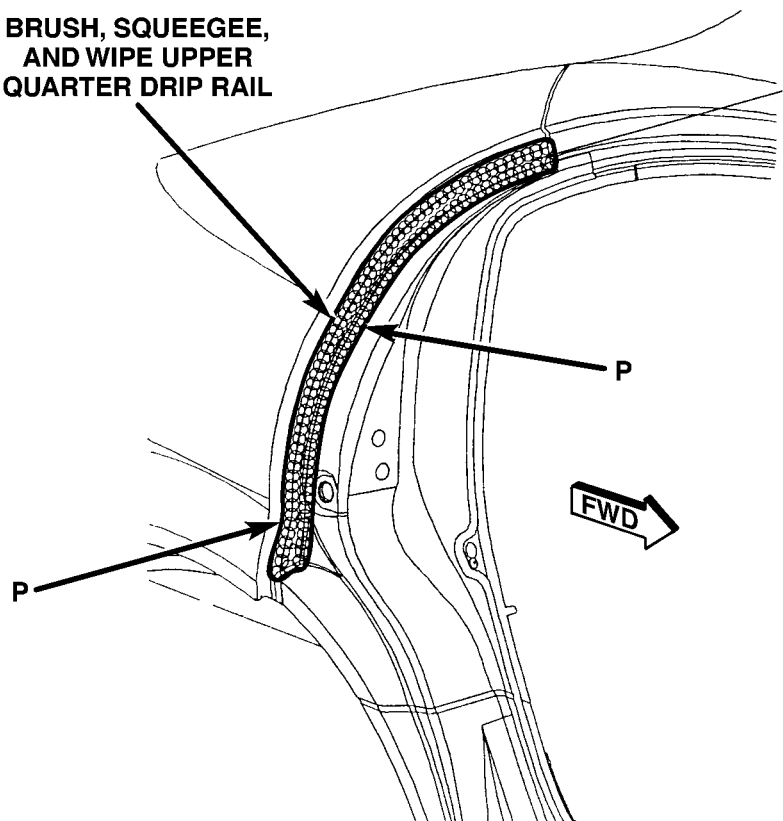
ROOF DRIP RAIL SEAL SUPPORT
